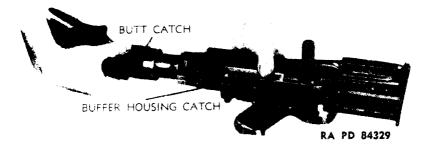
German 7.9-mm Dual Purpose Machine Gun MG34 — Removal of Butt
